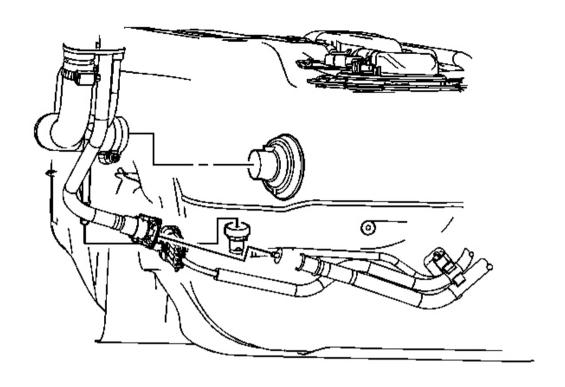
View Of Fuel Filler Pipe, EVAP Vent & Fresh Air Hose From The Fuel Tank Courtesy of GENERAL MOTORS CORP.
